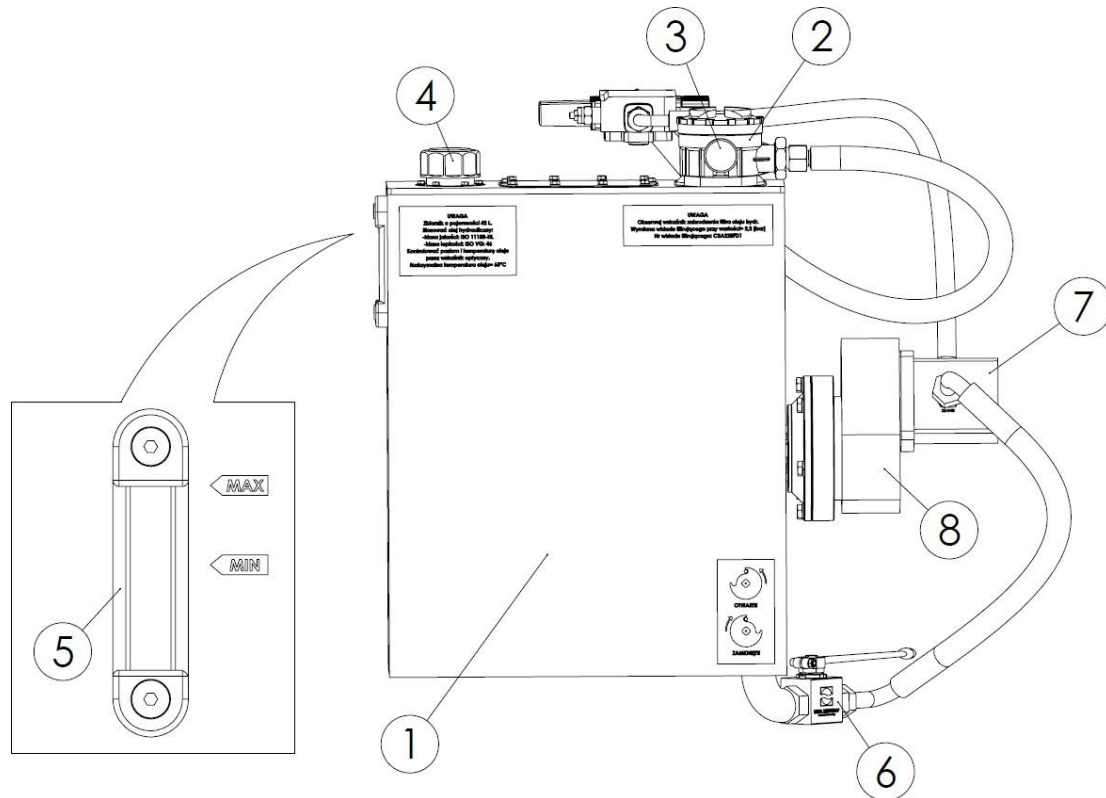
Onboard hydraulic system: 1 - oil tank, 2 - filter, 3 - soiling indicator, 4 - oil filler, 5 - oil level indicator, 6 - ball valve, 7 - hydraulic pump, 8 - multiplier
